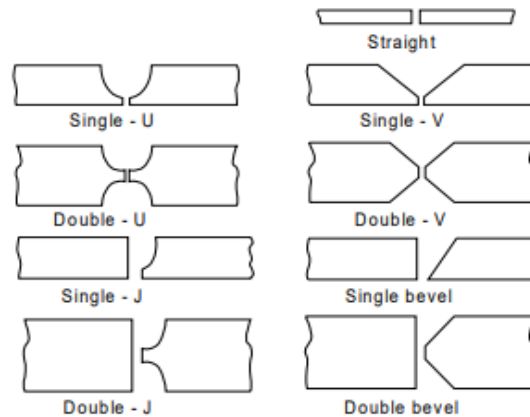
Shows Butt Welding Joints Edge Preparations (wordpress.com).
